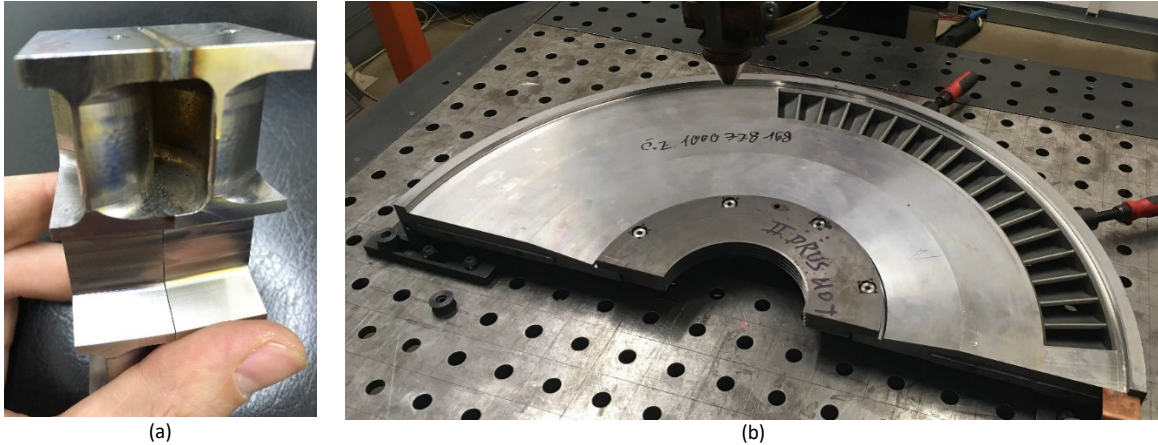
(a) welded pack of steam turbine blades; (b) steam turbine wheel
